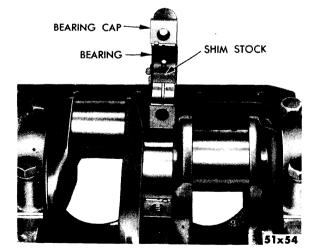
Checking Main Bearing Clearance With Shim Stock
